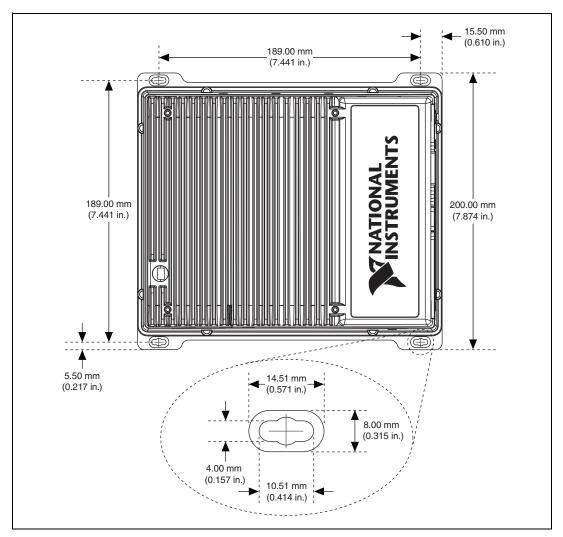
Top View of the NI EVS-1464 Series Device with Dimensions
